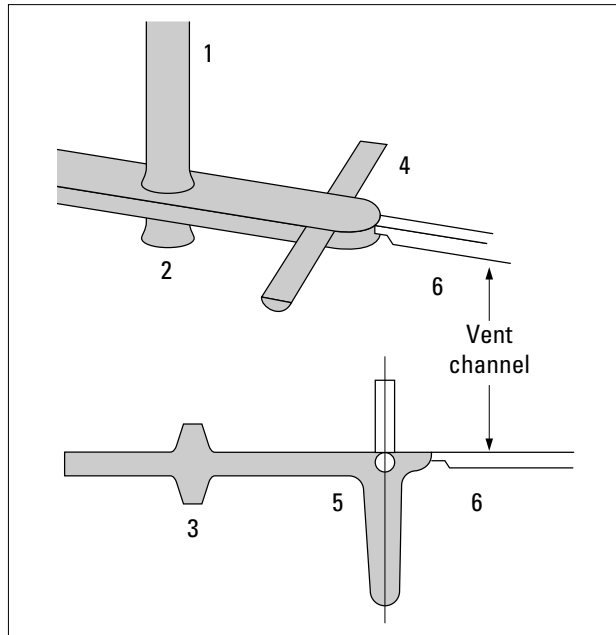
Key rules for the design of the sprue and runners of a 2 plate mould (top) and of a 3 plate mould (bottom)
